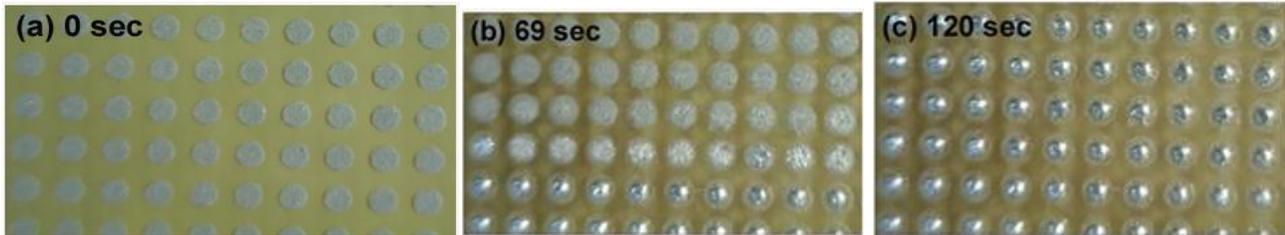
Reflow progress of printed solder paste immersed in epoxy flux A and covered with a glass slide on a 250°C hot plate.
